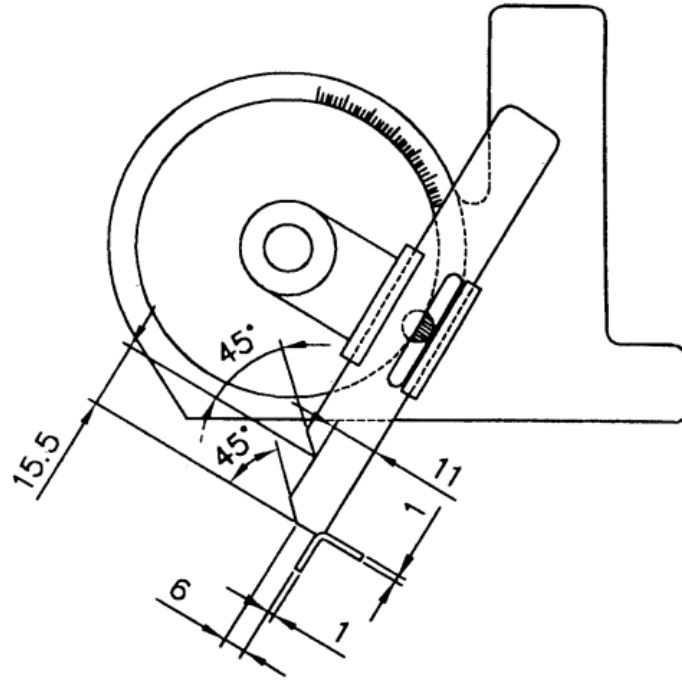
TOOL FOR MEASURING ANGLE 'B'
